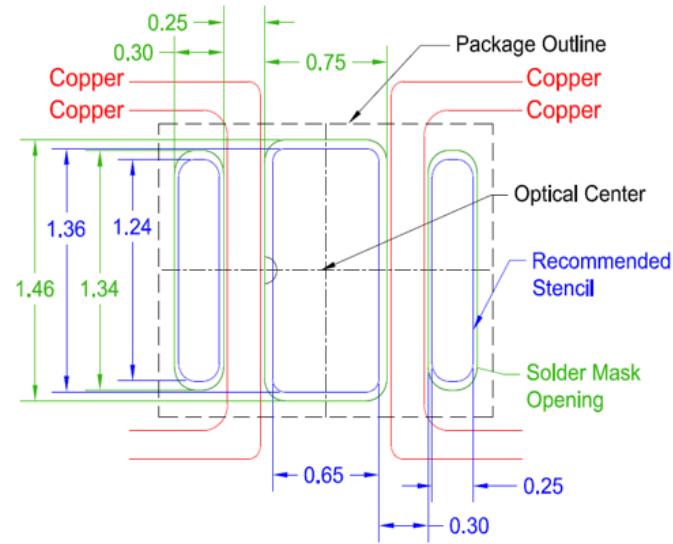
Recommended PCB solder pad layout for LUXEON CZ ES Color Line
